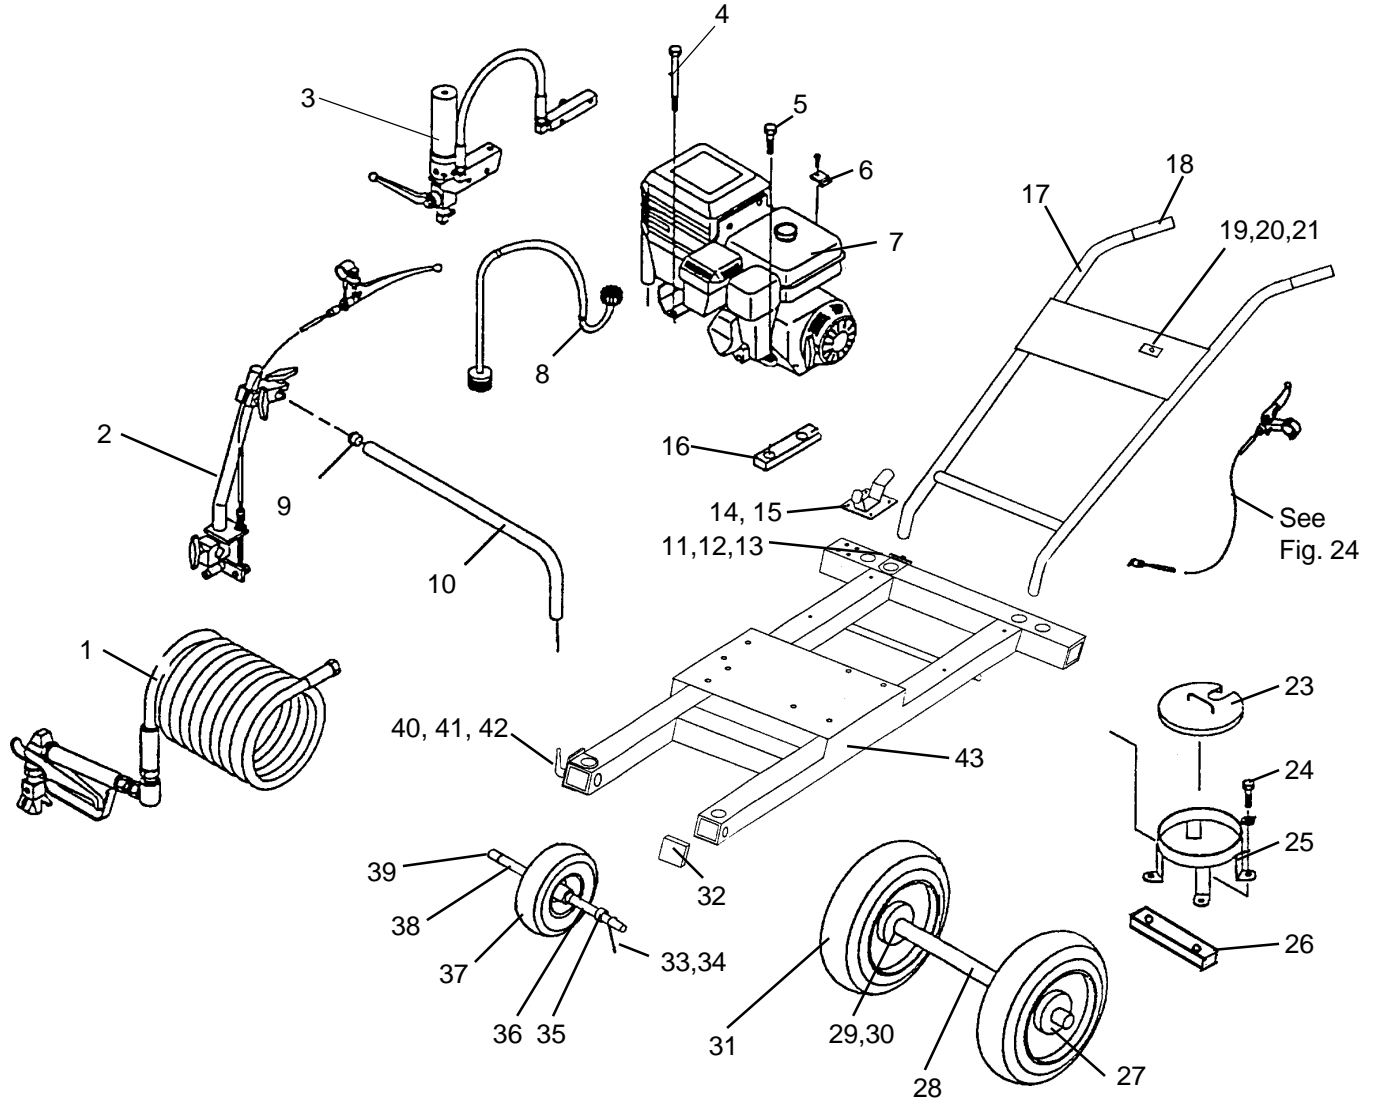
PARTS LIST, POWER UNIT ASSEMBLY, PN 305-010
